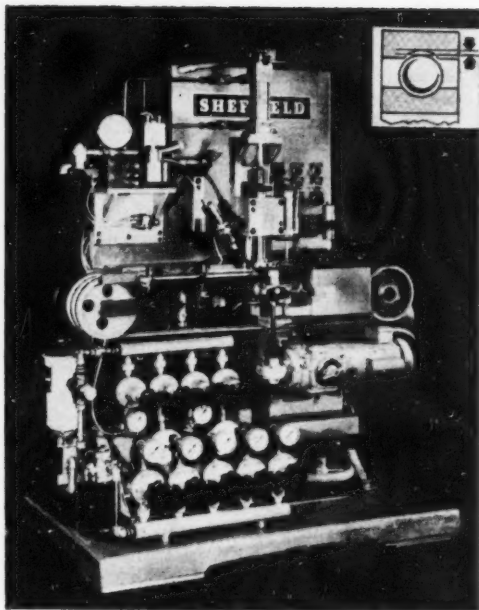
Sheffield Chekmatic Automatic Inspection Machine for Ball Bearings
